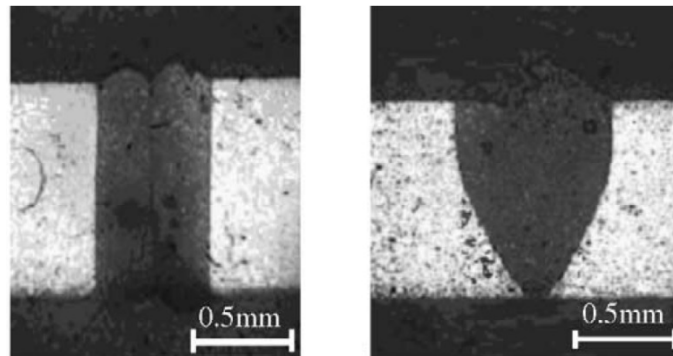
CO₂ laser welding with (a) central under-cut weld, (b) surface irregularity [3]
